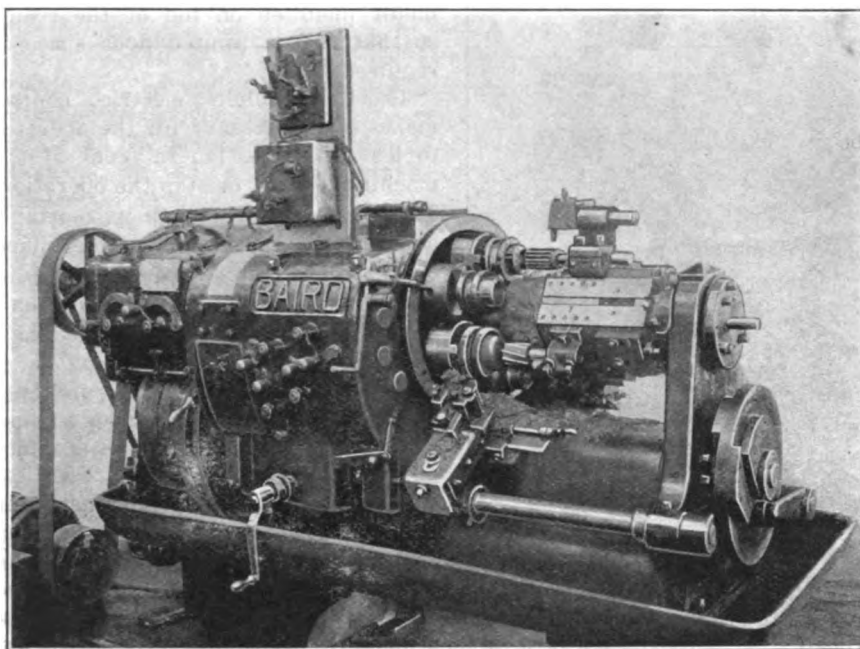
BAIRD SIX-SPINDLE CHUCKING MACHINE
